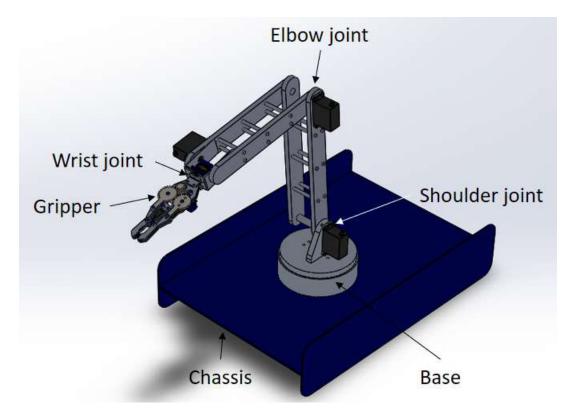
Isometric View of complete manipulator arm design mounted on Chassis body
